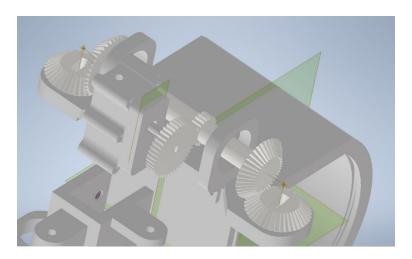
Illustration of the gear's arrangement highlighting the lid mechanism.
